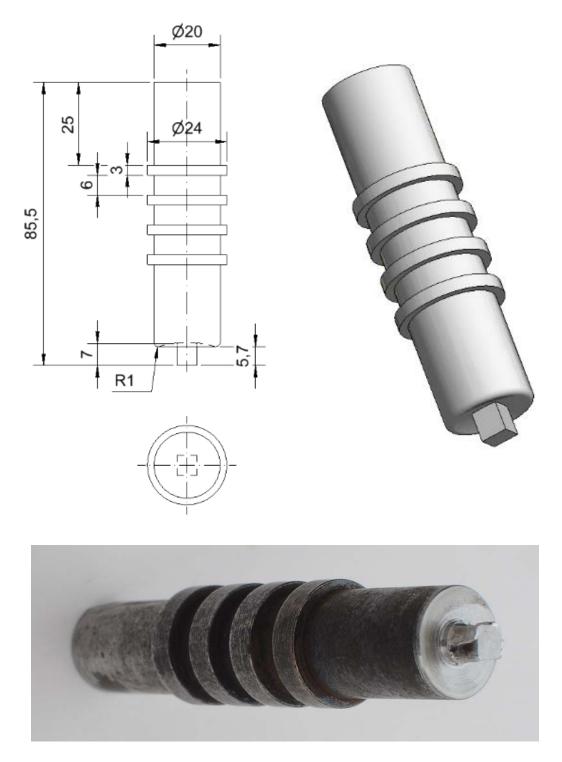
Tool geometry used for the friction stir welding of AA 6082 T6 alloy square pin and concave shoulder (C4)
